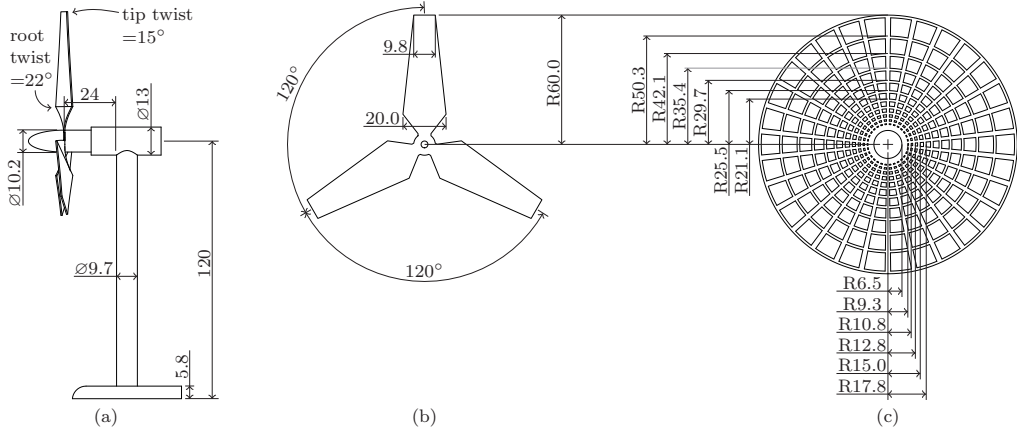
Scale drawings of the geometry of the (a) turbine model with pressed rotor, (b) rotor flat pattern, and (c) porous disk. All dimensions are in millimeters unless otherwise noted. The mounting adapter for the hub of the disk is not shown.
